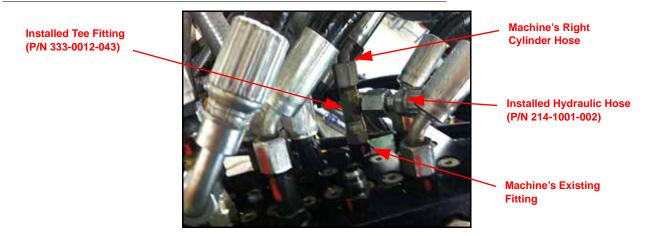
Left Cylinder Return Hose Installed on AutoBoom Valve
